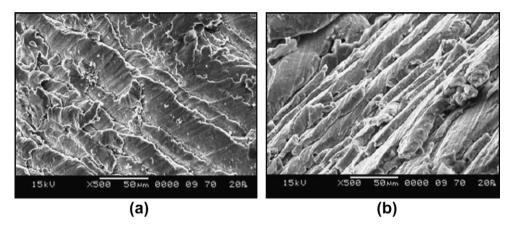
SEM fractographs of the root regions of tensile tested specimens; (a) as-welded; (b) heat treated.
